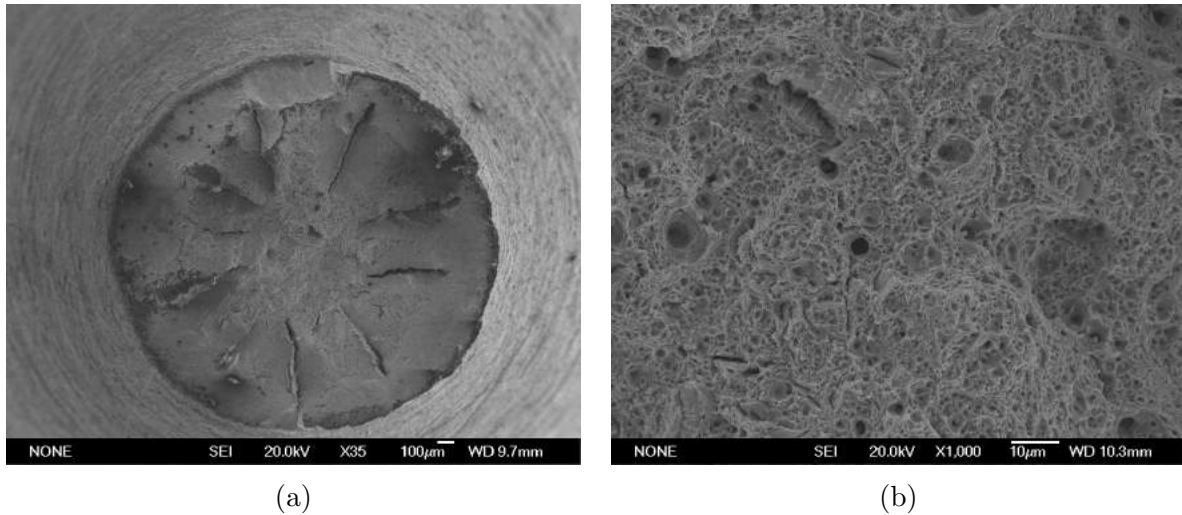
SEM micrographs showing the fracture surfaces of the 40U3 sample.
